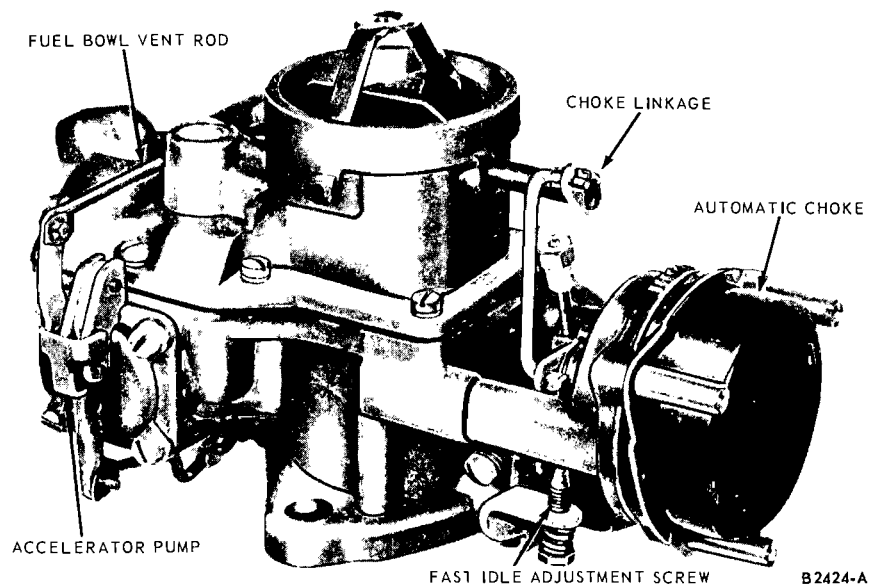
Autolite Model 1100 1-V Carburetor—Left Rear 3/4 View
